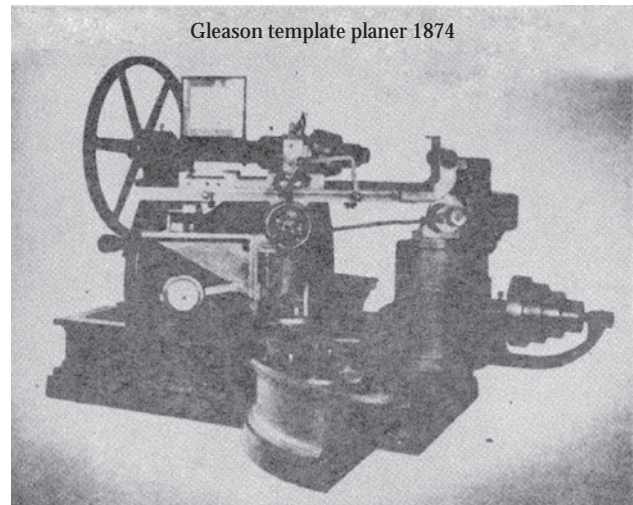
Gleason bevel gear planing machine. (Courtesy of Gleason Works, Rochester, New York.)
